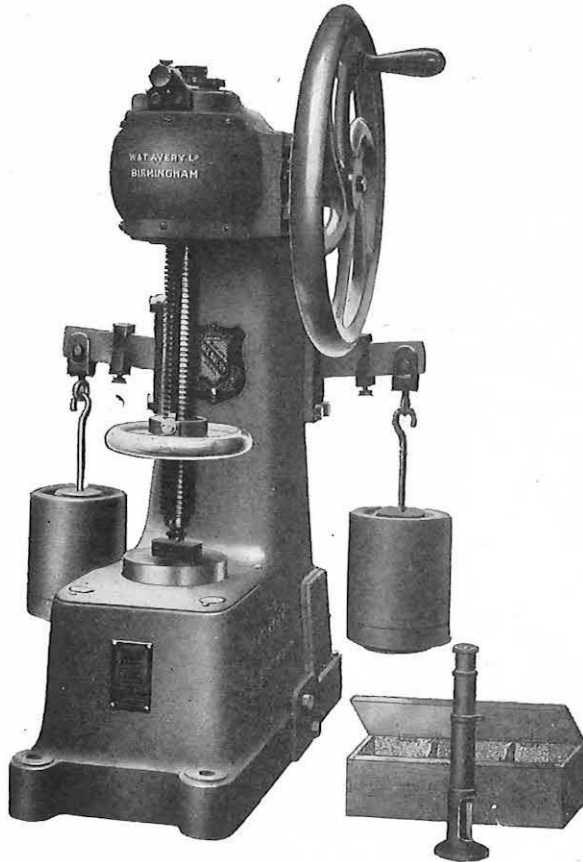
AVERY NO. 691 BRINELL TESTING MACHINE.
